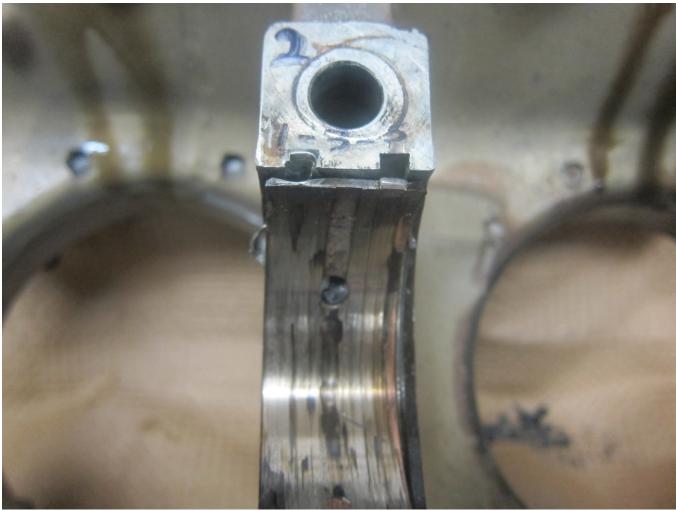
View of No. 2 main bearing saddle and No. 2 main bearing. Note remnants of silk thread.
